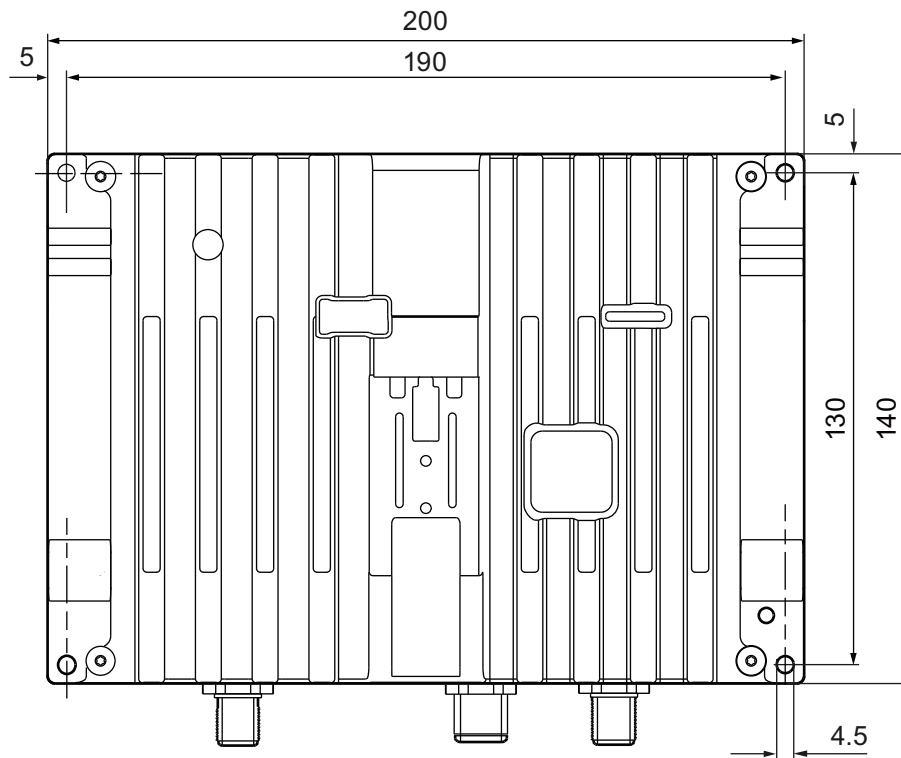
Drilling pattern for the RF290R (dimensions in mm)
